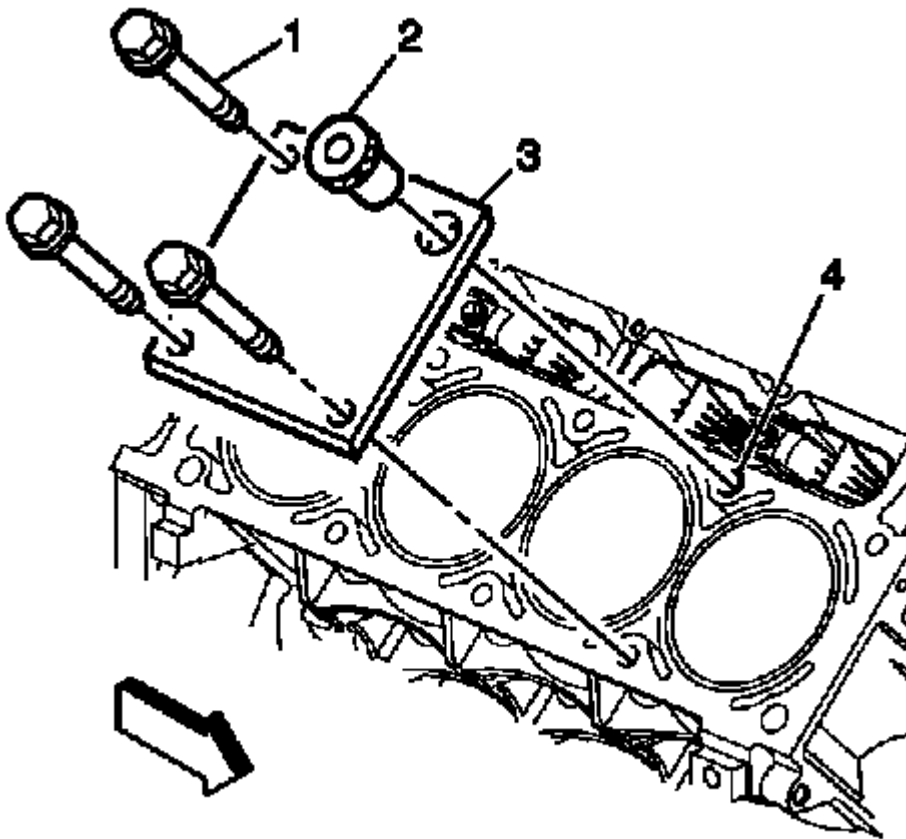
View Of Fixture Plate, Bolts, Bushing & Cylinder Hole
